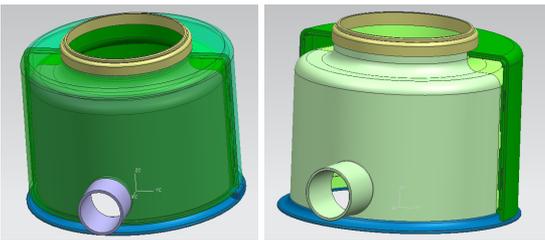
Plastic + rubber sheet cover fabrication drawings
